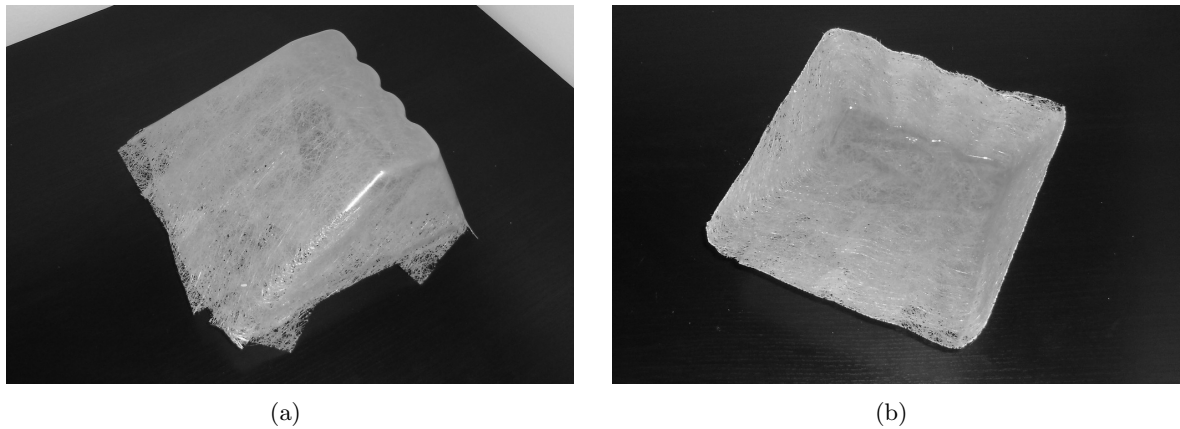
Finishing operation of the hand layup part moulded in the SPIF mould: (a) part as demoulded (b) part after trimming
